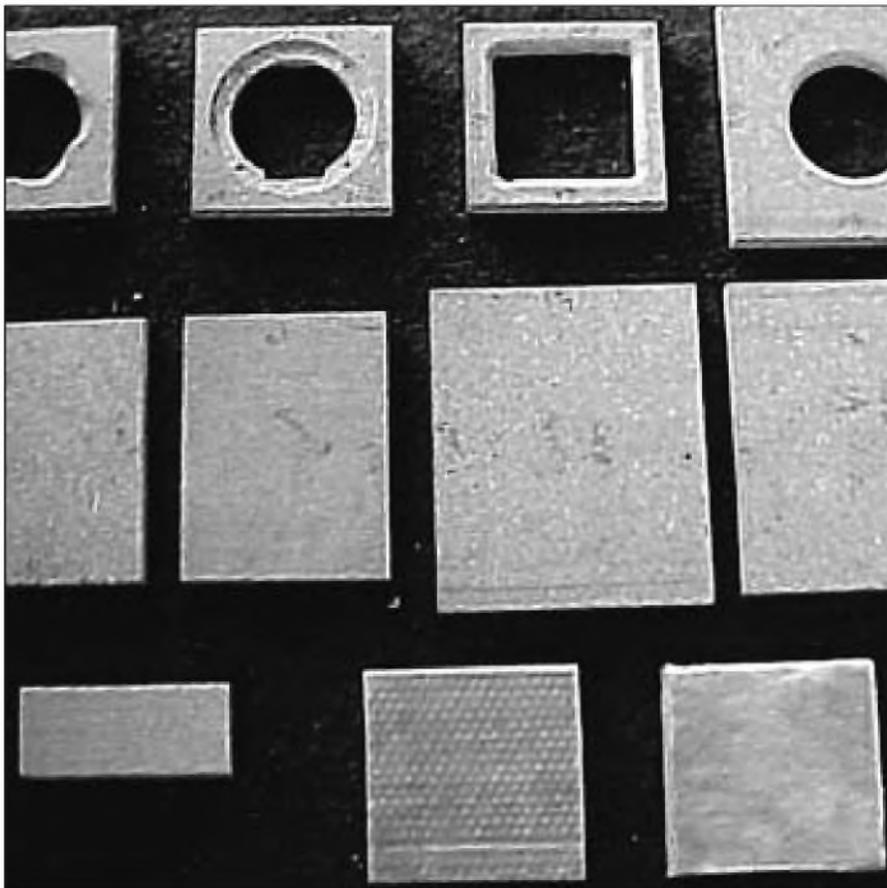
Array of pieces to build boxes #7 and #8—see text for layout.
